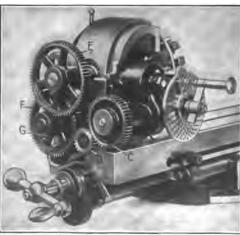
Index Head equipped with Compound Gearing for Differential Indexing
